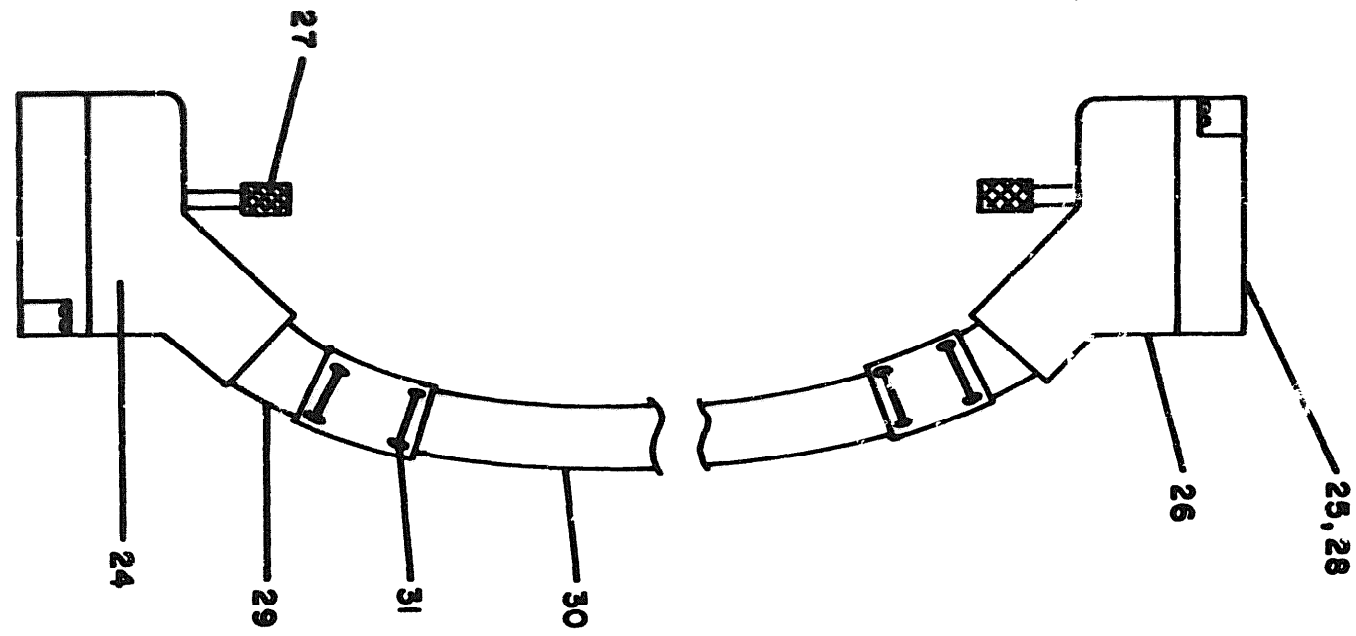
Master Control Panel Assembly (Sheet 2 of 3)
